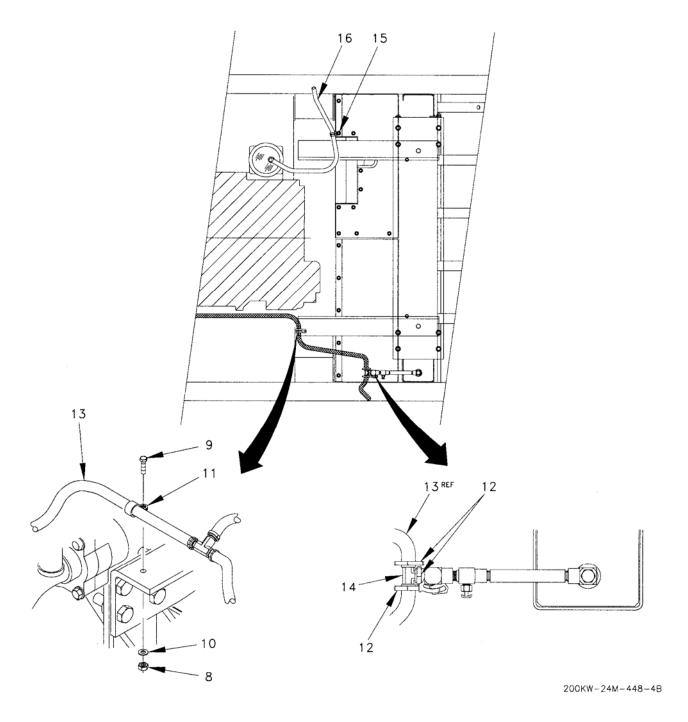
Coolant Hose Assemblies (Sheet 4 of 4).
